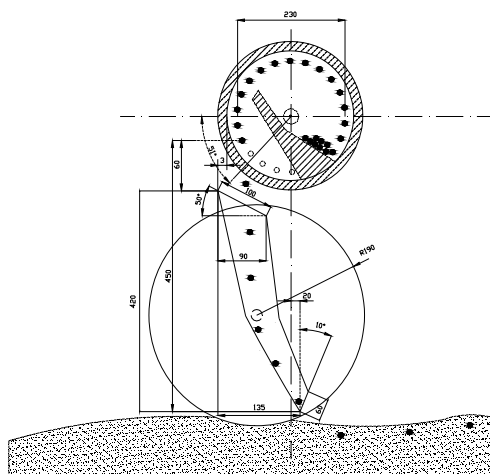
Side view of Kuhn- Maxima HD metering unit and its dimensions
